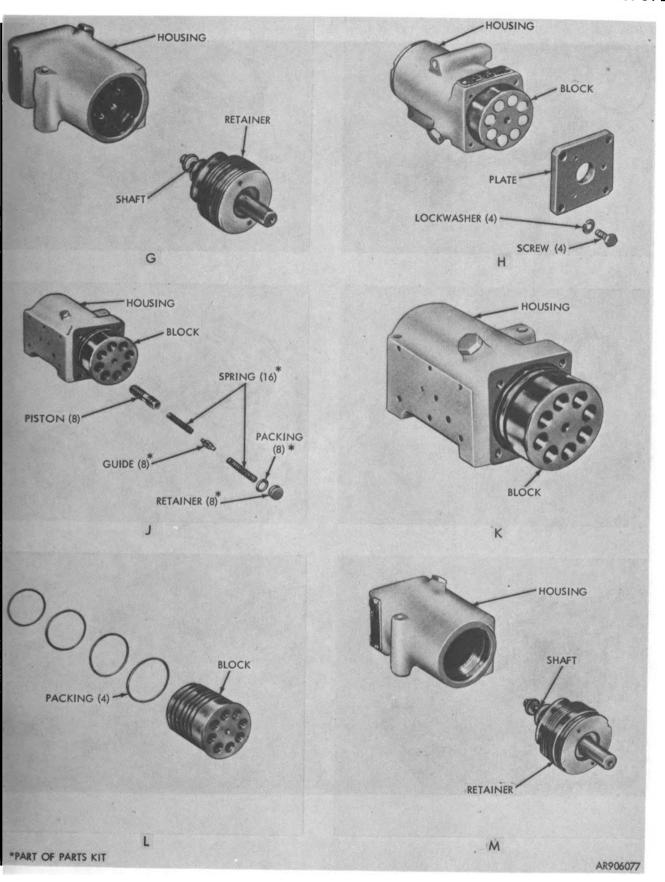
Manual elevation pump disassembly or assembly (2 of 4).
